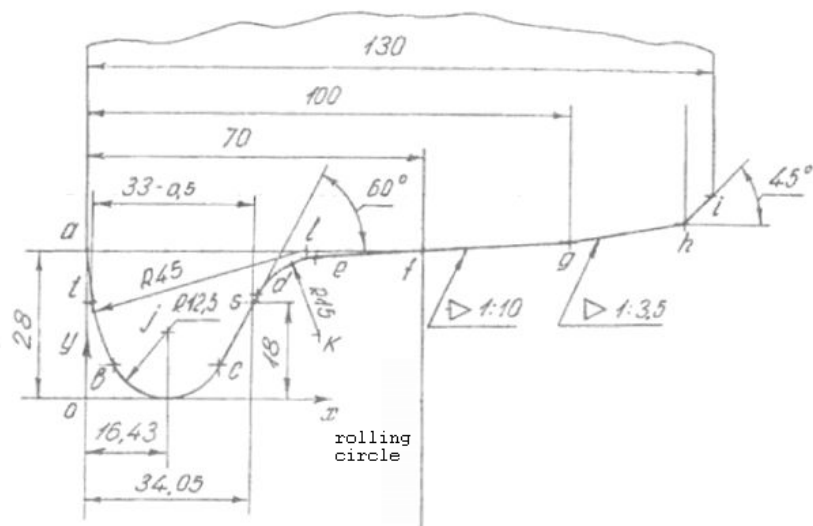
Wheel profile of the rolling stock of the motor carriage with 28 mm high flange
